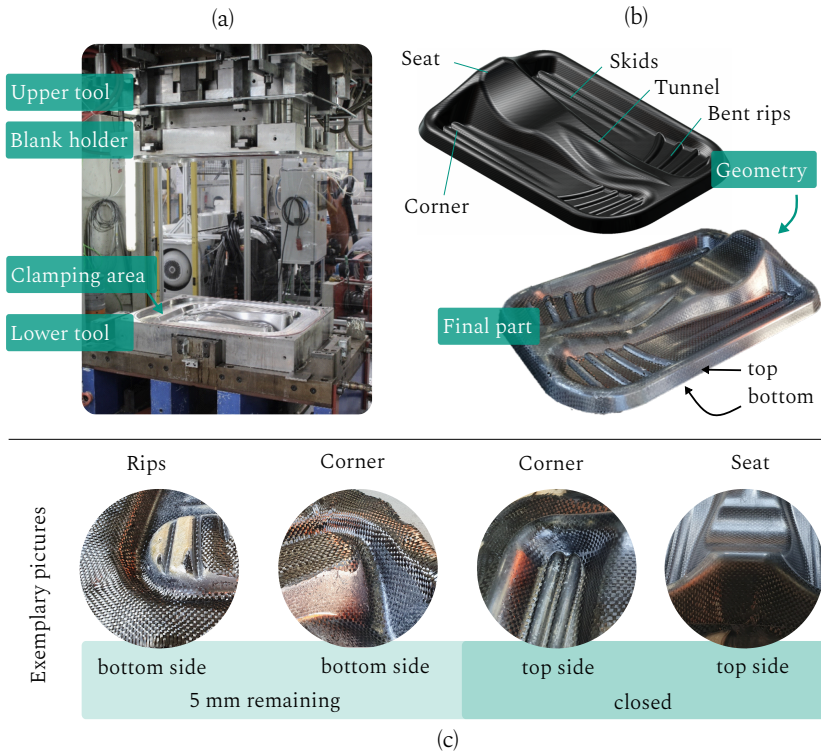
Demonstrator | (a) Tooling at Fraunhofer ICT; (b) Geometry and manufactured part; (c) Results at specific locations (rips, corners and seat) for the partly and fully closed mould.
